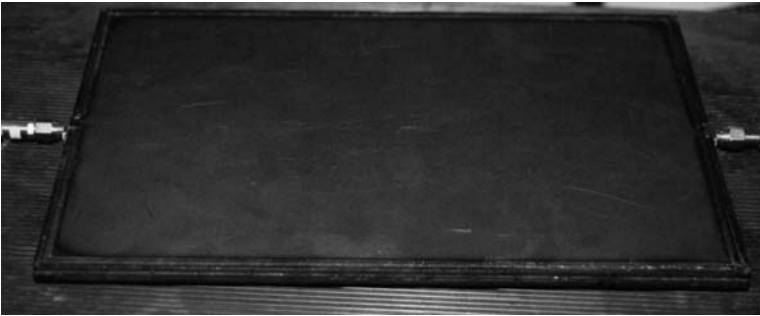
A photo of the laser-welded filter. The main dimensions are (L×W×T) 254 mm × 185.2 mm × 4.5 mm.
